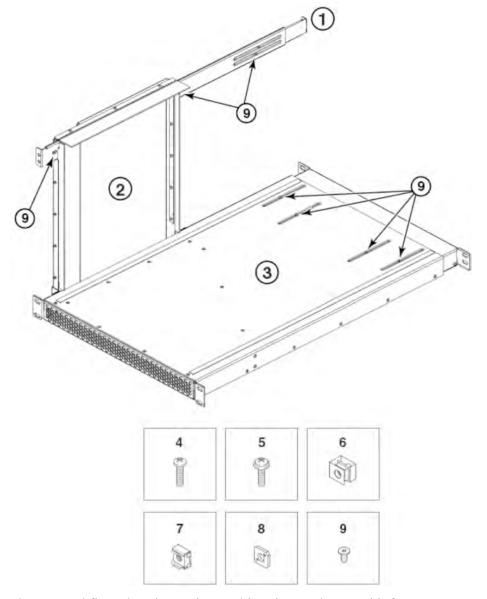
Airflow Diversion and Port-Side Exhaust Kit Assembly for 68.58 to 78.74 cm (27-31 in.) Racks
